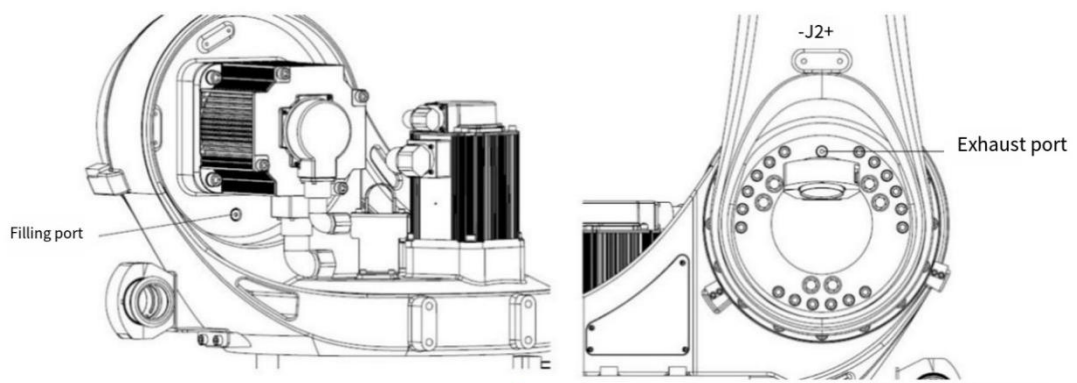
Lubricant Replacement for J2 Shaft Reducer
